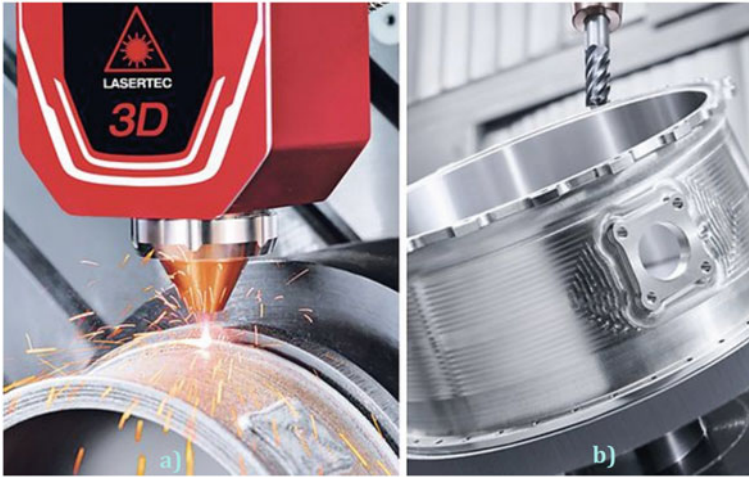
Hybrid manufacturing process: a Laser Deposition Welding (DED), b milling (Courtesy of DMG MORI)
